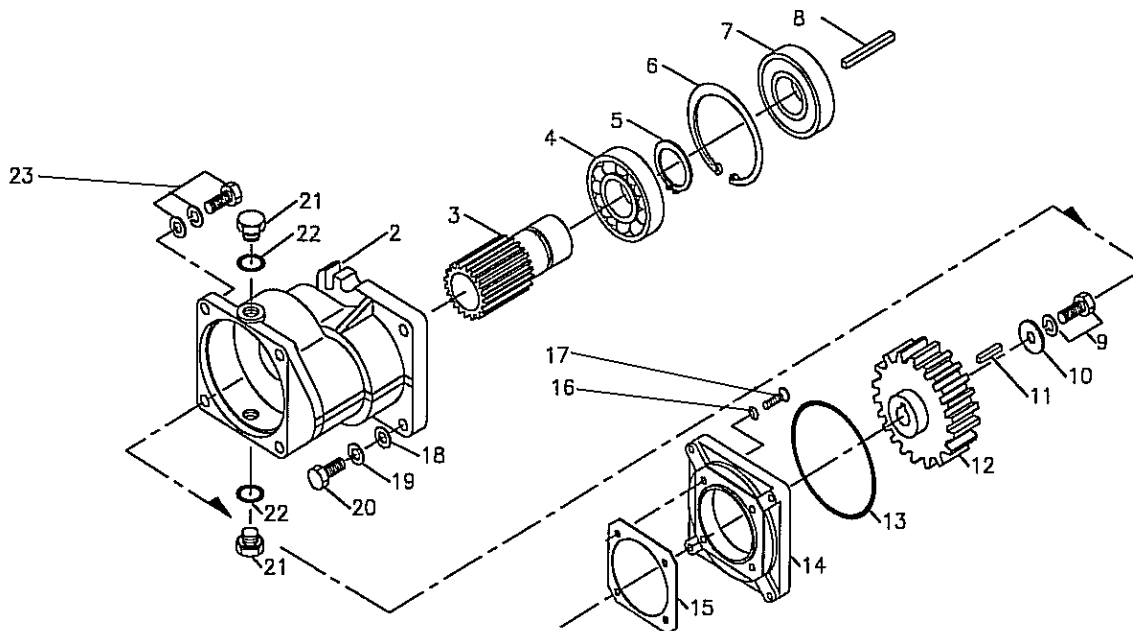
High-Pressure Pump Module Gearbox (Exploded View).
